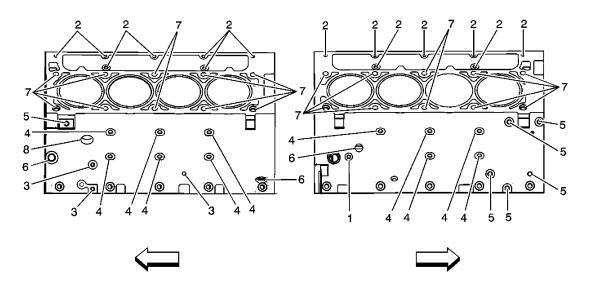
Engine Block - Left/Right Side Views Courtesy of GENERAL MOTORS CORP.
